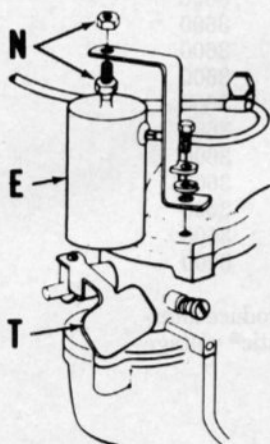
Loadamatic® Automatic Idle Control* is adjusted by turning nuts (N) until bottom of electromagnet (E) is parallel with throttle arm (T). Do not bend throttle arm or electromagnet bracket.
